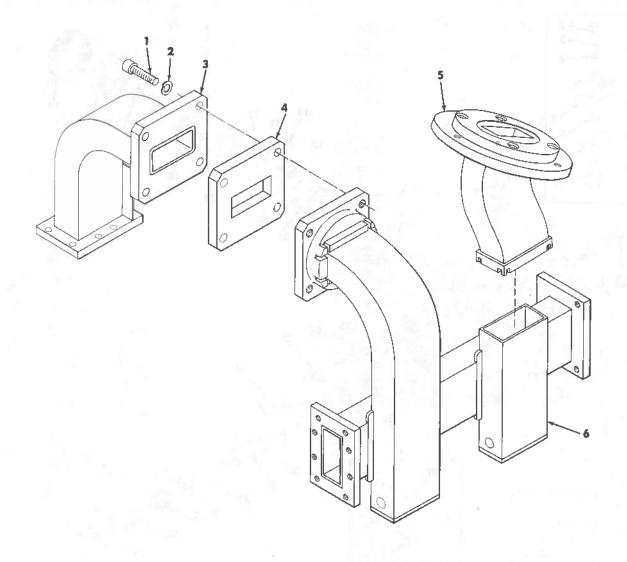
MOUNT, THERMISTOR /8010866/-EXPLODED VIEW /SEE FIGURE 141 FOR NEXT HIGHER ASSEMBLY/
